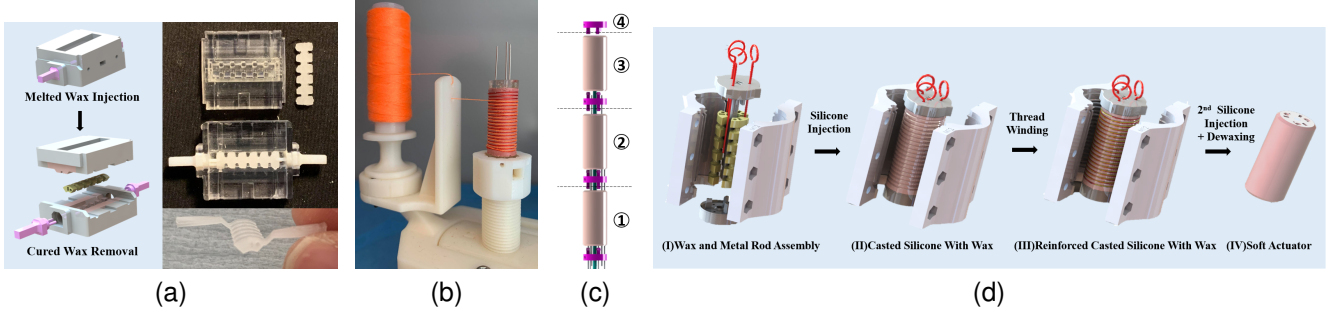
(a) Wax mould employed to fabricate the internal geometry of the chambers. (b) Custom 3D-printed thread winding station. (c) Sequence of assembly for the actuated segments. (d) Key steps in the fabrication process.
